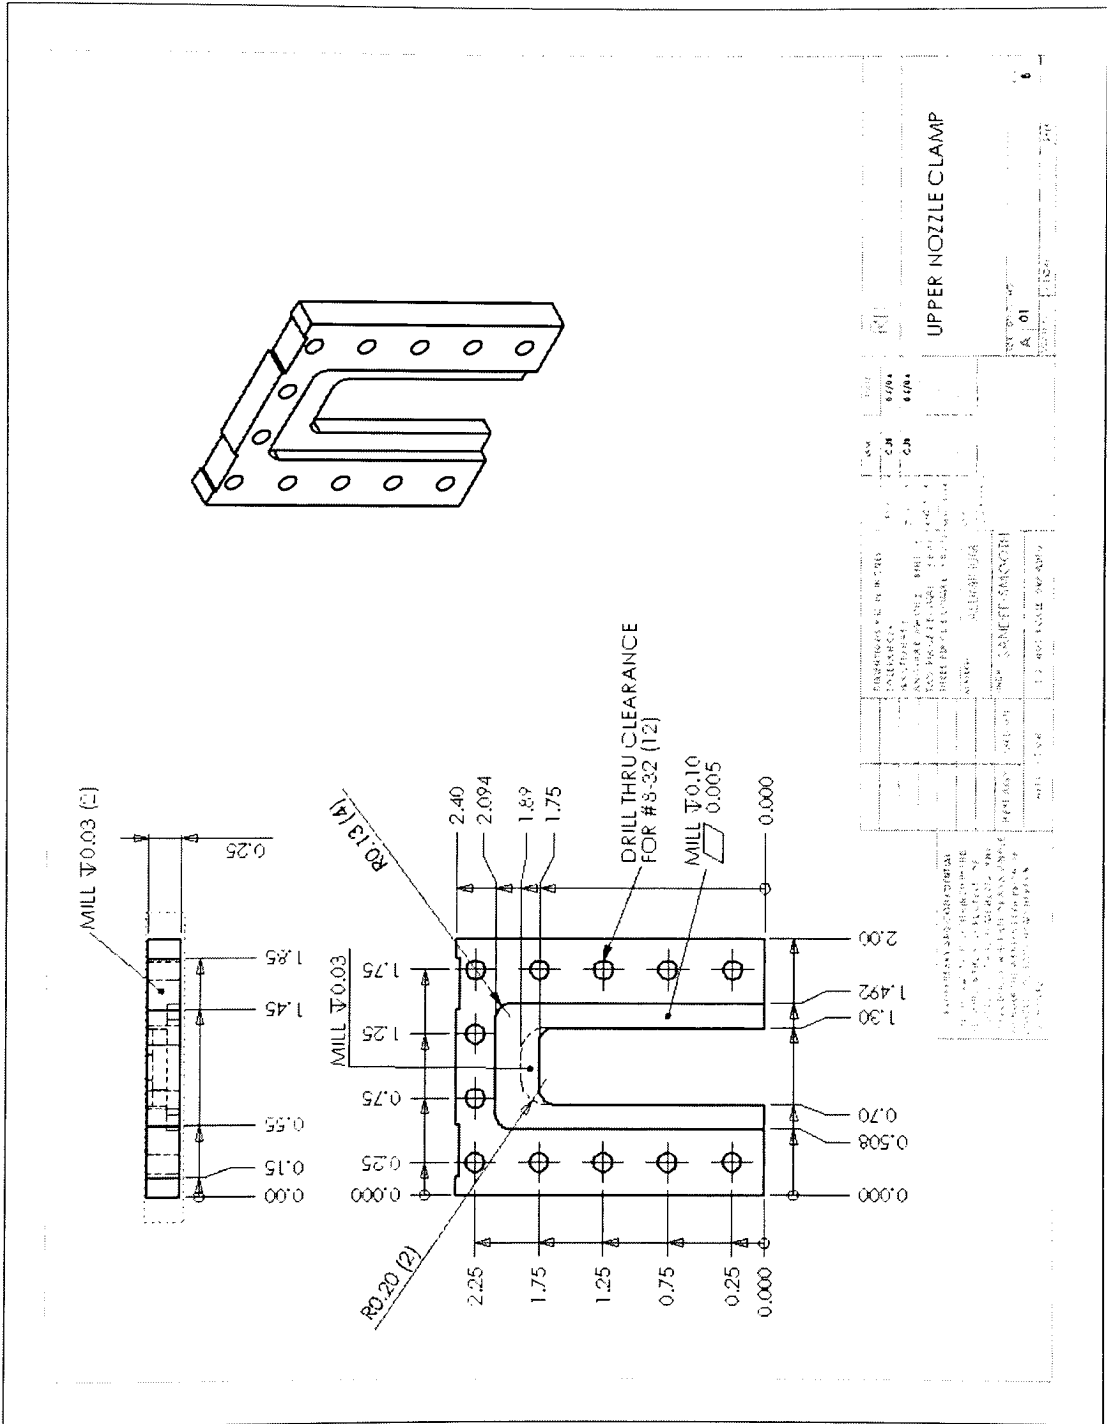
Upper Nozzle Clamp Detail Drawing
